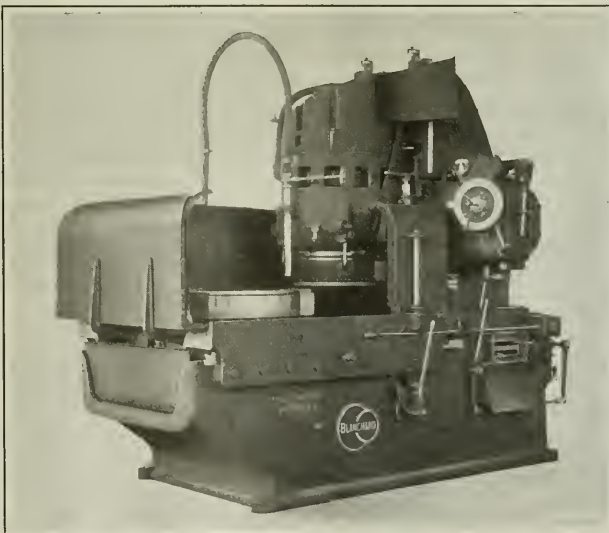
No. 27-R High-power Vertical-spindle Surface Grinding Machine built by the Blanchard Machine Co.
